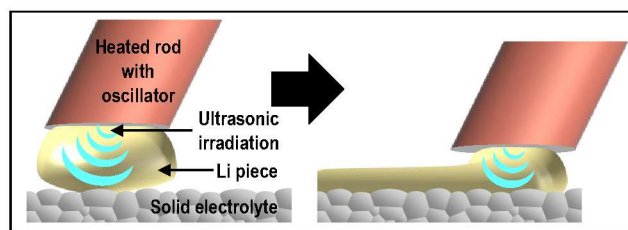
Scheme of the ultrasonic-assisted fusion welding method.
